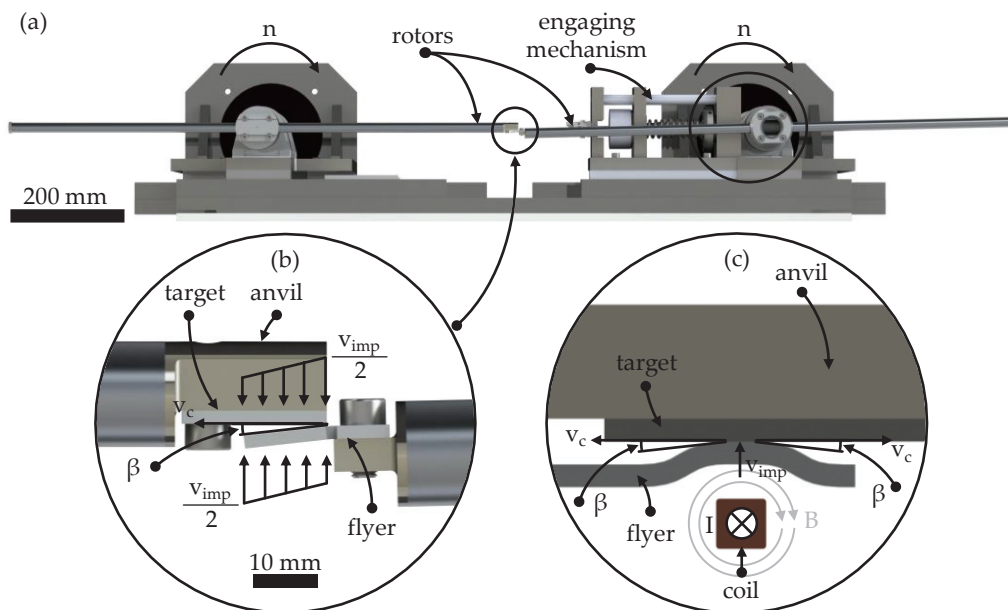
(a) The model test rig consists of two synchronised rotating rotors and an engaging mechanism. (b) The specimens are mounted at the end of each rotor. (c) Process setup EMPW according to [39].
